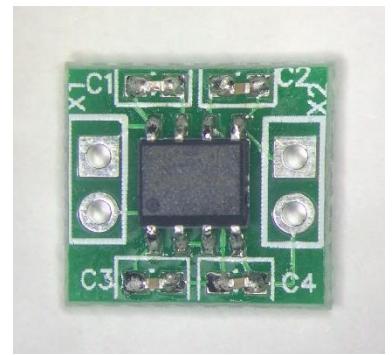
Hall sensor PCB with components soldered. Note the careful alignment of the Hall sensor IC
